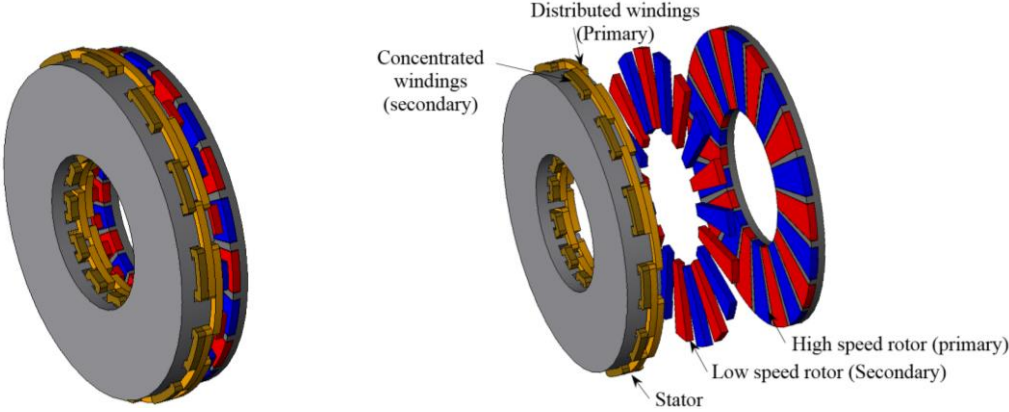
Magnetic geared machine presented in [NIU14].
